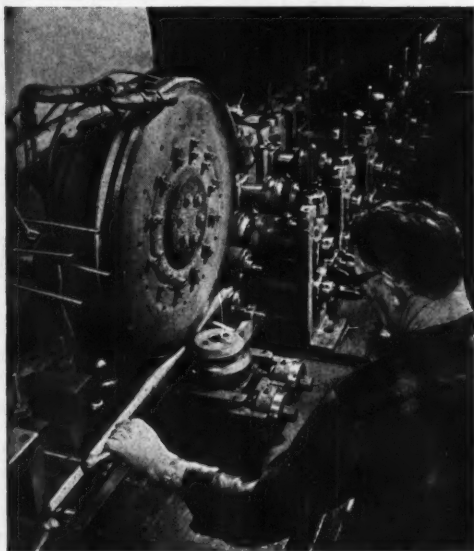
Yoder tube mill equipped with the new type V vapour-cooled resistance welding unit
